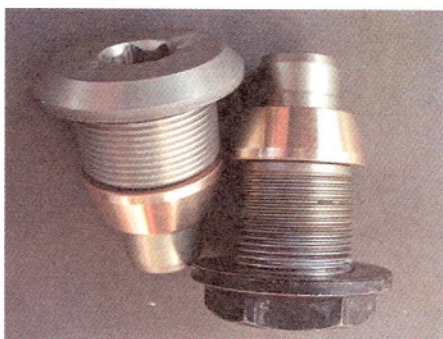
The final drive housing must be heated to 250° F and the bearing races fitted straight and true in the recess. The bushings can then be lubed and installed.
